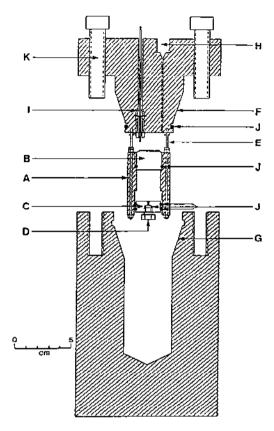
Pressure vessel for Calgary cell: (A) cell; (B) Teflon plug carrying electrical connections; (C) free piston; (D) sealing plug; (E) threaded steel support rods; (F) main sealing surface of cap (39° cone); (G) main sealing surface of body (40° cone); (H) pressurizing fluid connection; (I) electrical feedthrough (brass conductor in Vespel insulating sleeve; one of four); (J) O-ring; (K) Hexhead bolt (0.625 inch NC. 2.25 inch long; eight of these, symmetrically placed). Reprinted with permission from Can. J. Chem. 70 (1992) 81. See references [21] and [56] for further details.
